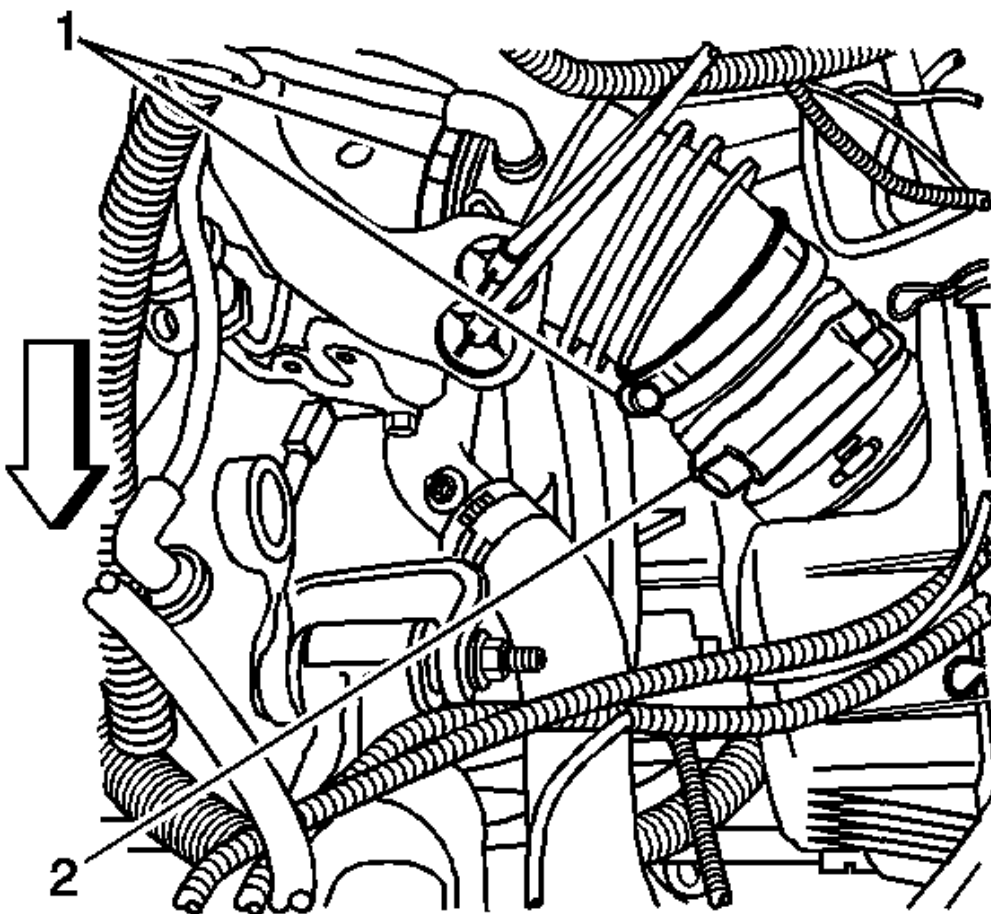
Locating Intake Air Duct Clamps From MAF Sensor & Throttle Body
